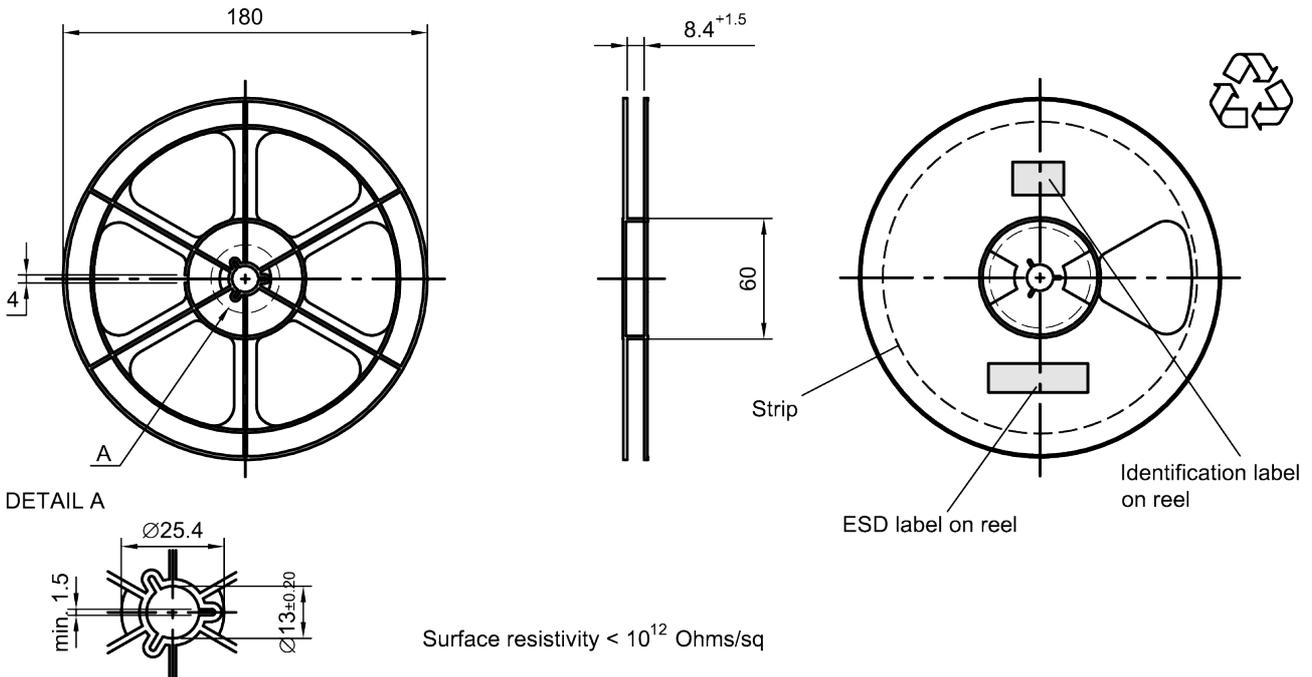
Drawing of reel (first-angle projection) with diameter of 180 mm.
